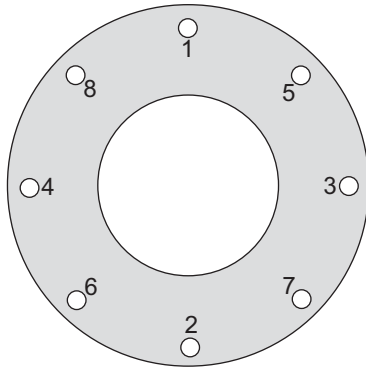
Tighten bolts diagonally / 8 bolts, spacing 45°
